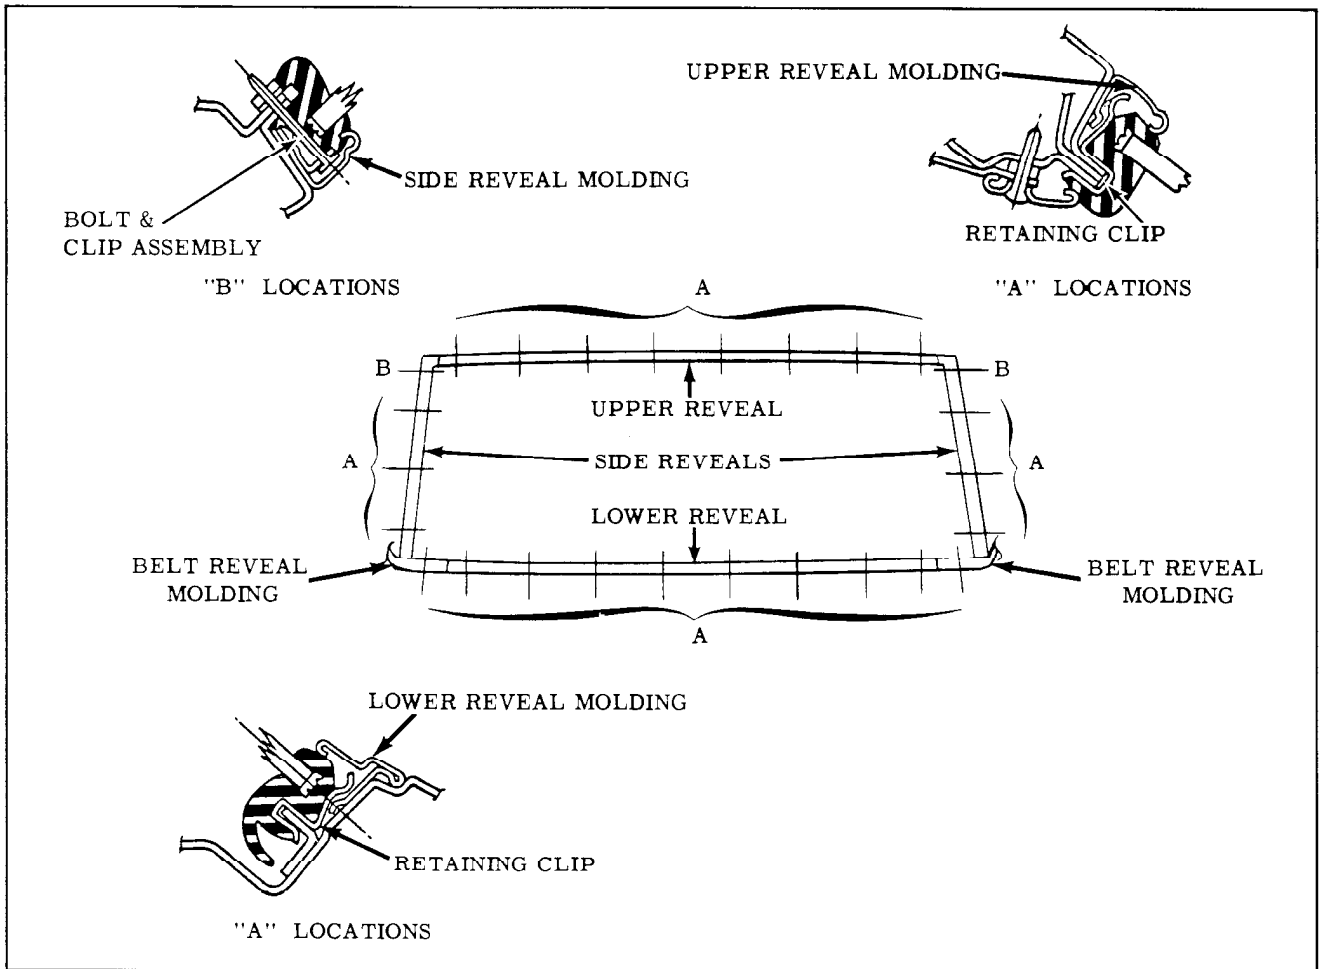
Back Window Reveal Moldings (3839, 3847 Styles)
